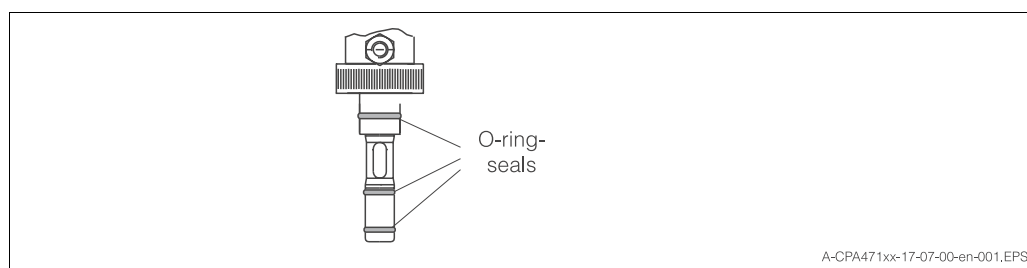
O-ring seals of the CPA 472 (in contact with medium)
